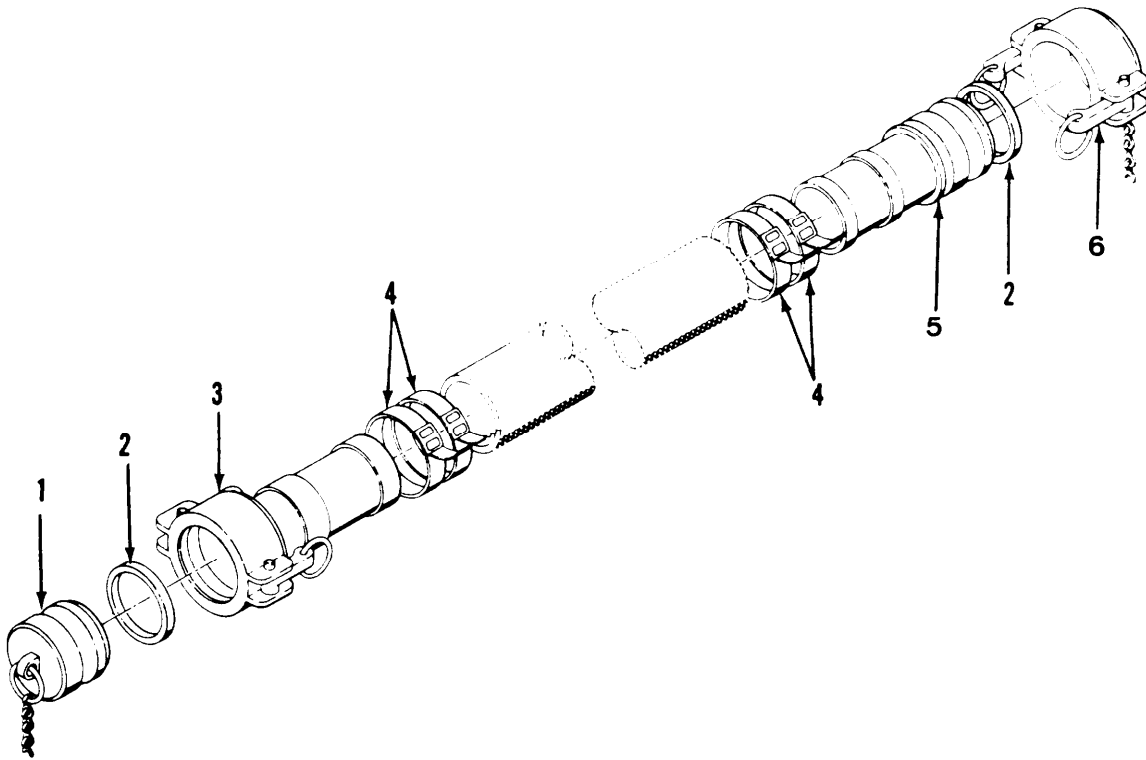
Suction Hose Assembly, 4 In. X 10 Ft.
